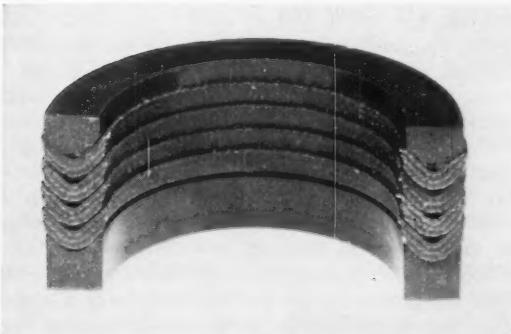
Cutaway view of set of four fabric V-rings with male adapter at top and female adapter at bottom.
